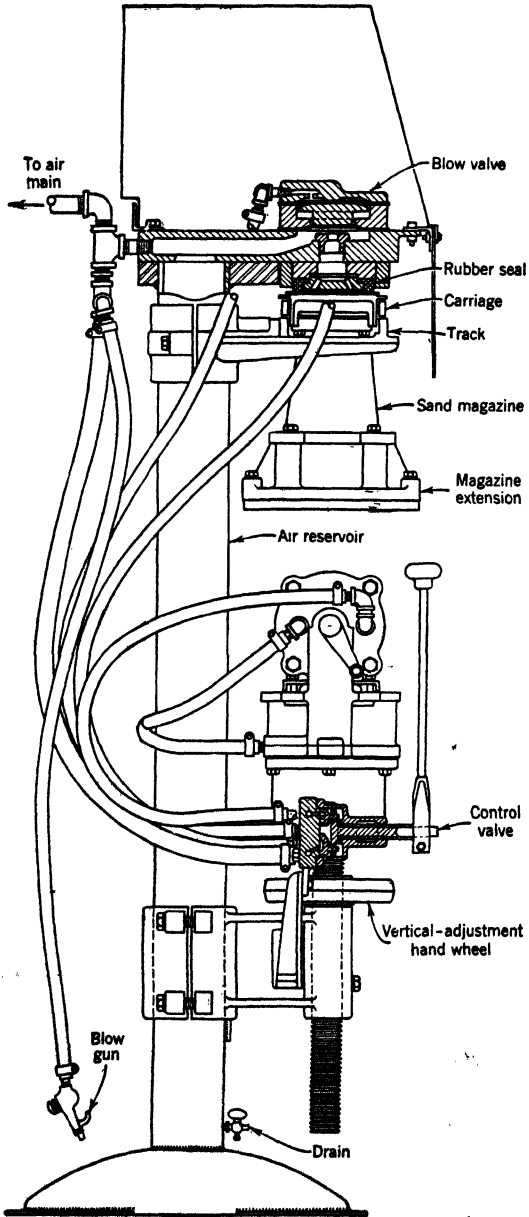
A Core blower. Side view. (Courtesy of Wm. Demmler & Bros., Kewanee, Ill.)
